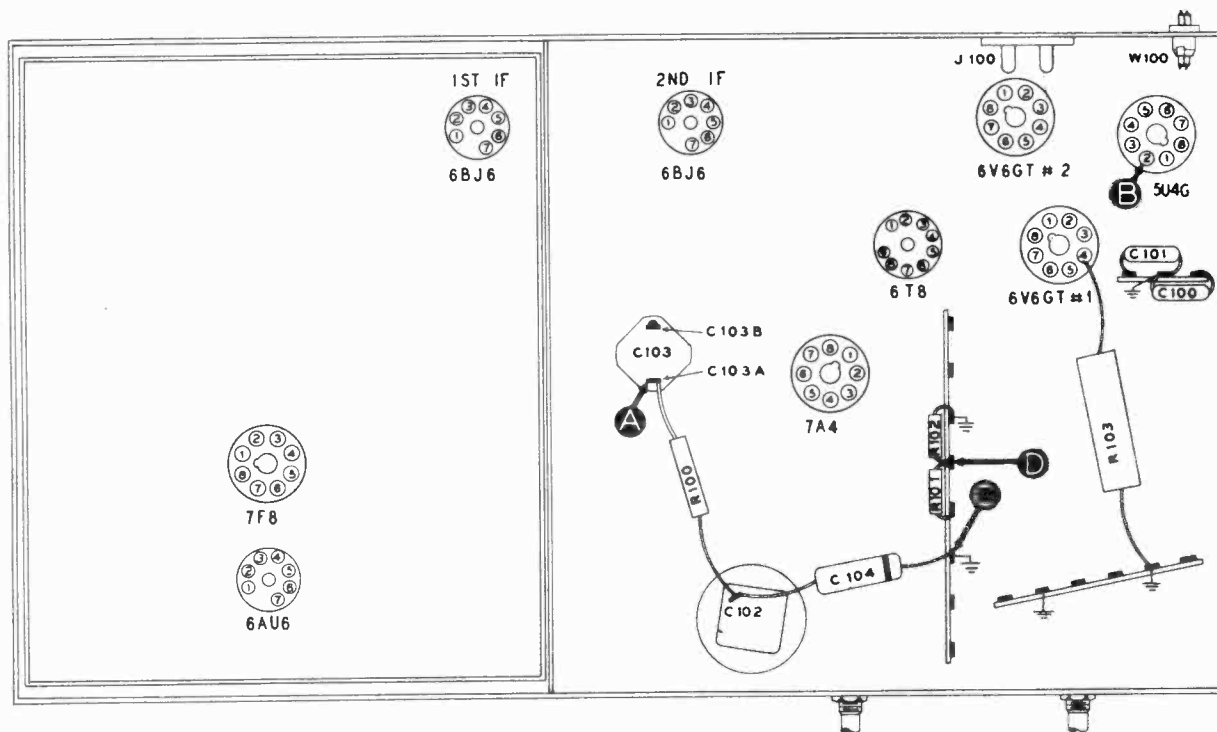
BOTTOM VIEW, SHOWING SECTION 1 TEST POINTS
